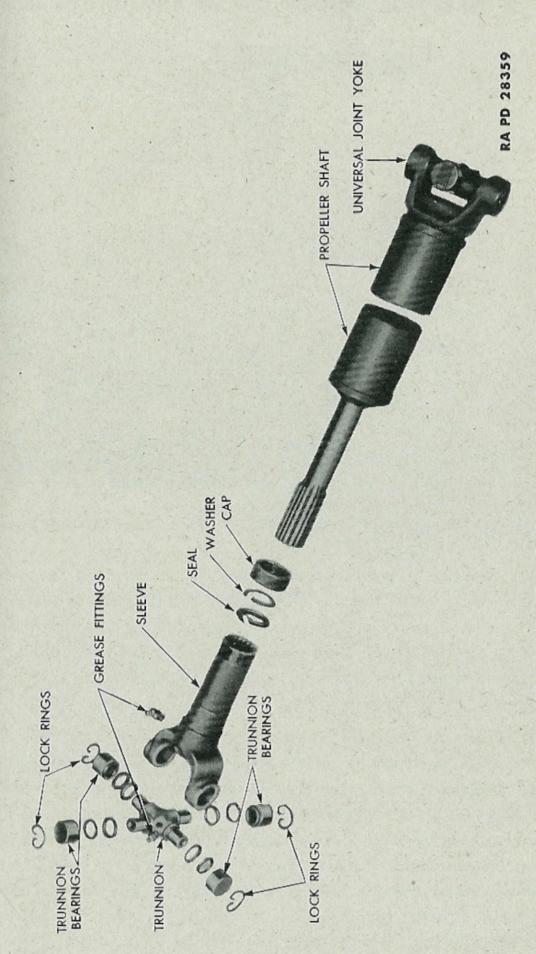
Propeller Shaft, Disassembled (U-Bolt Type)
